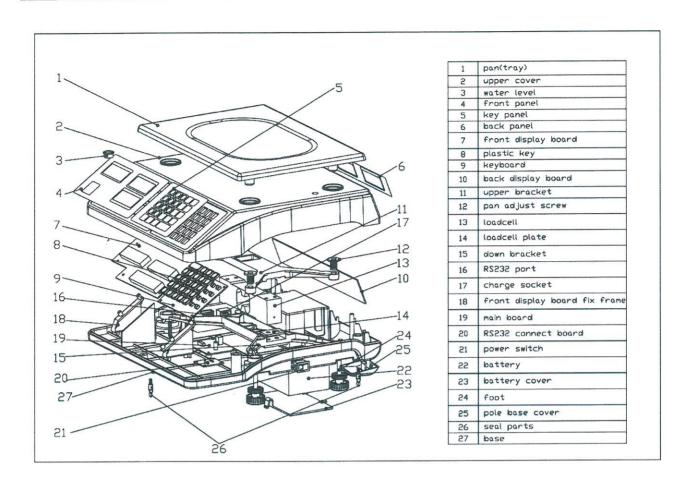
Exploded view of instrument (variants ACS-6E, ACS-15E, ACS-30E)
